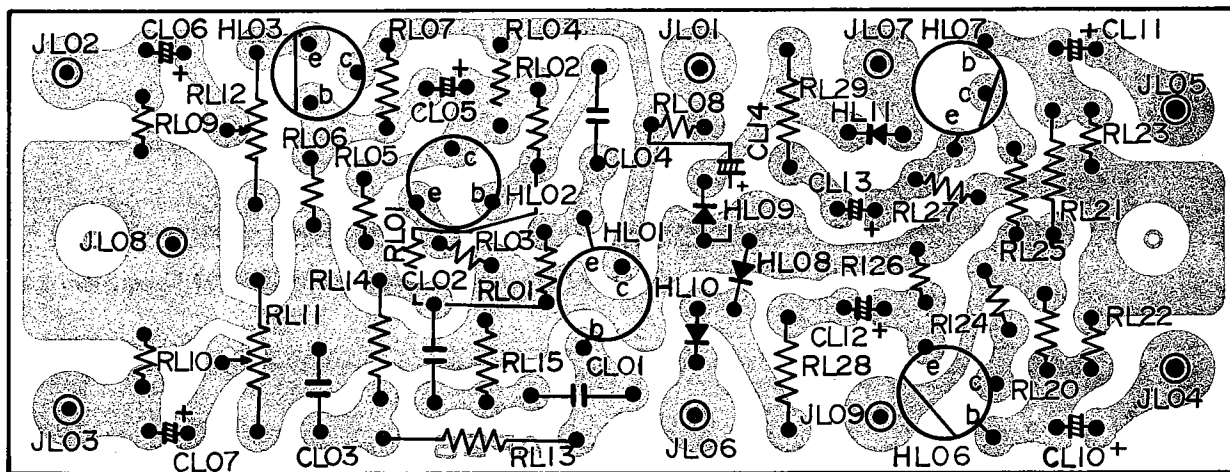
400Hz Oscillator and Meter Driver Assembly PL01 Component Locations
